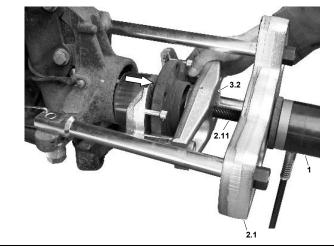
Remove pull/pressure plate assembly from wheel hub bearing unit.
